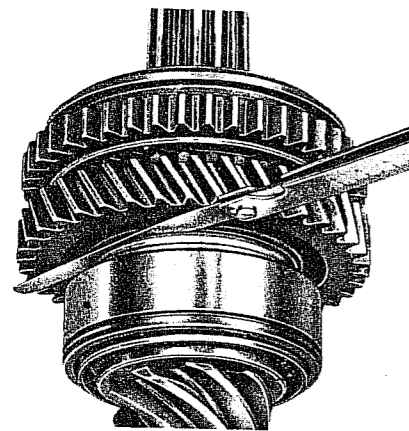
Checking the axial play of the 1st speed gear wheel.
